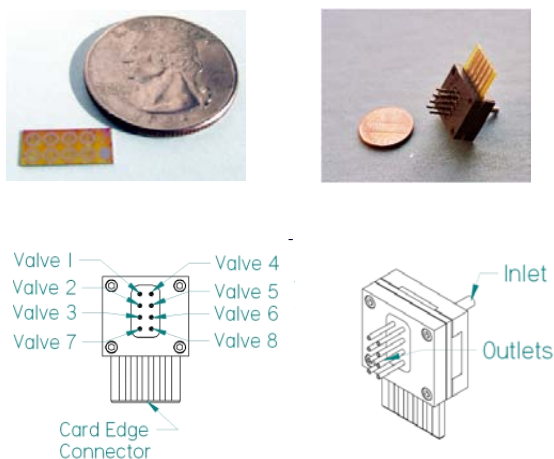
Top-left: photograph of die containing eight microvalves; top-right: photograph of assembled and packed eight-microvalve system; bottom-left: back view of package showing valve output port assignments; bottom-right: orthogonal view of package.
